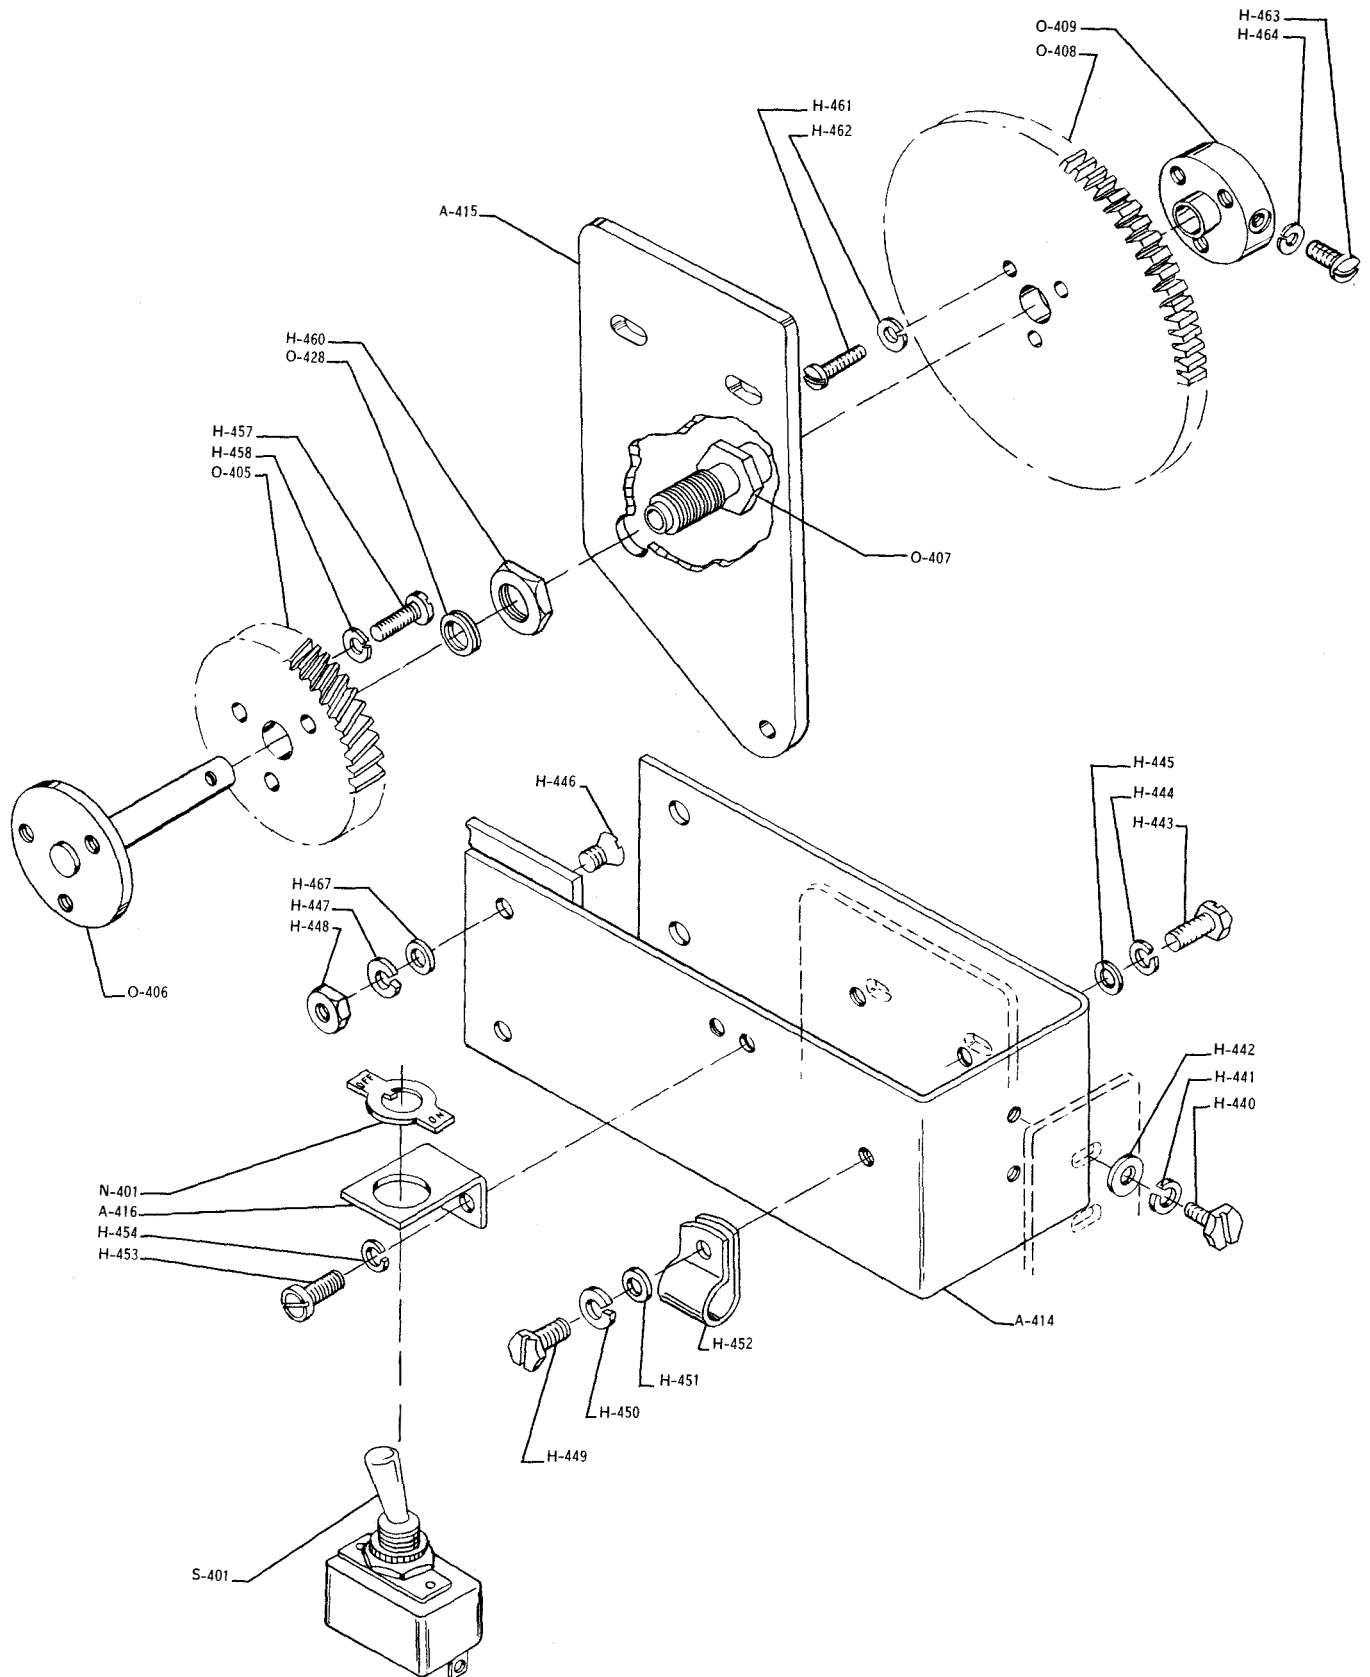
Reeling Machine RL-173/FGC, Driven Shaft Assembly
